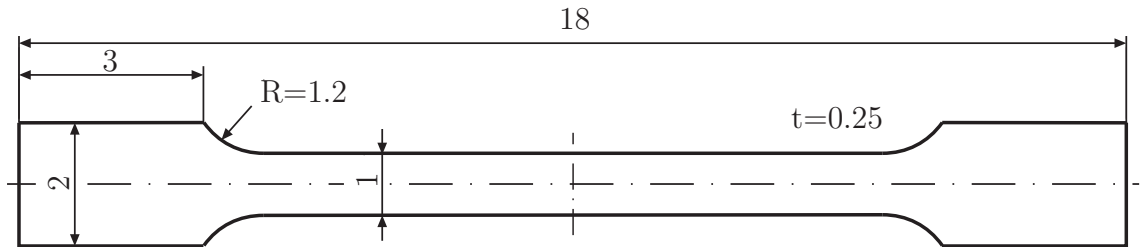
Drawing of the specimen (all dimensions in inches).
